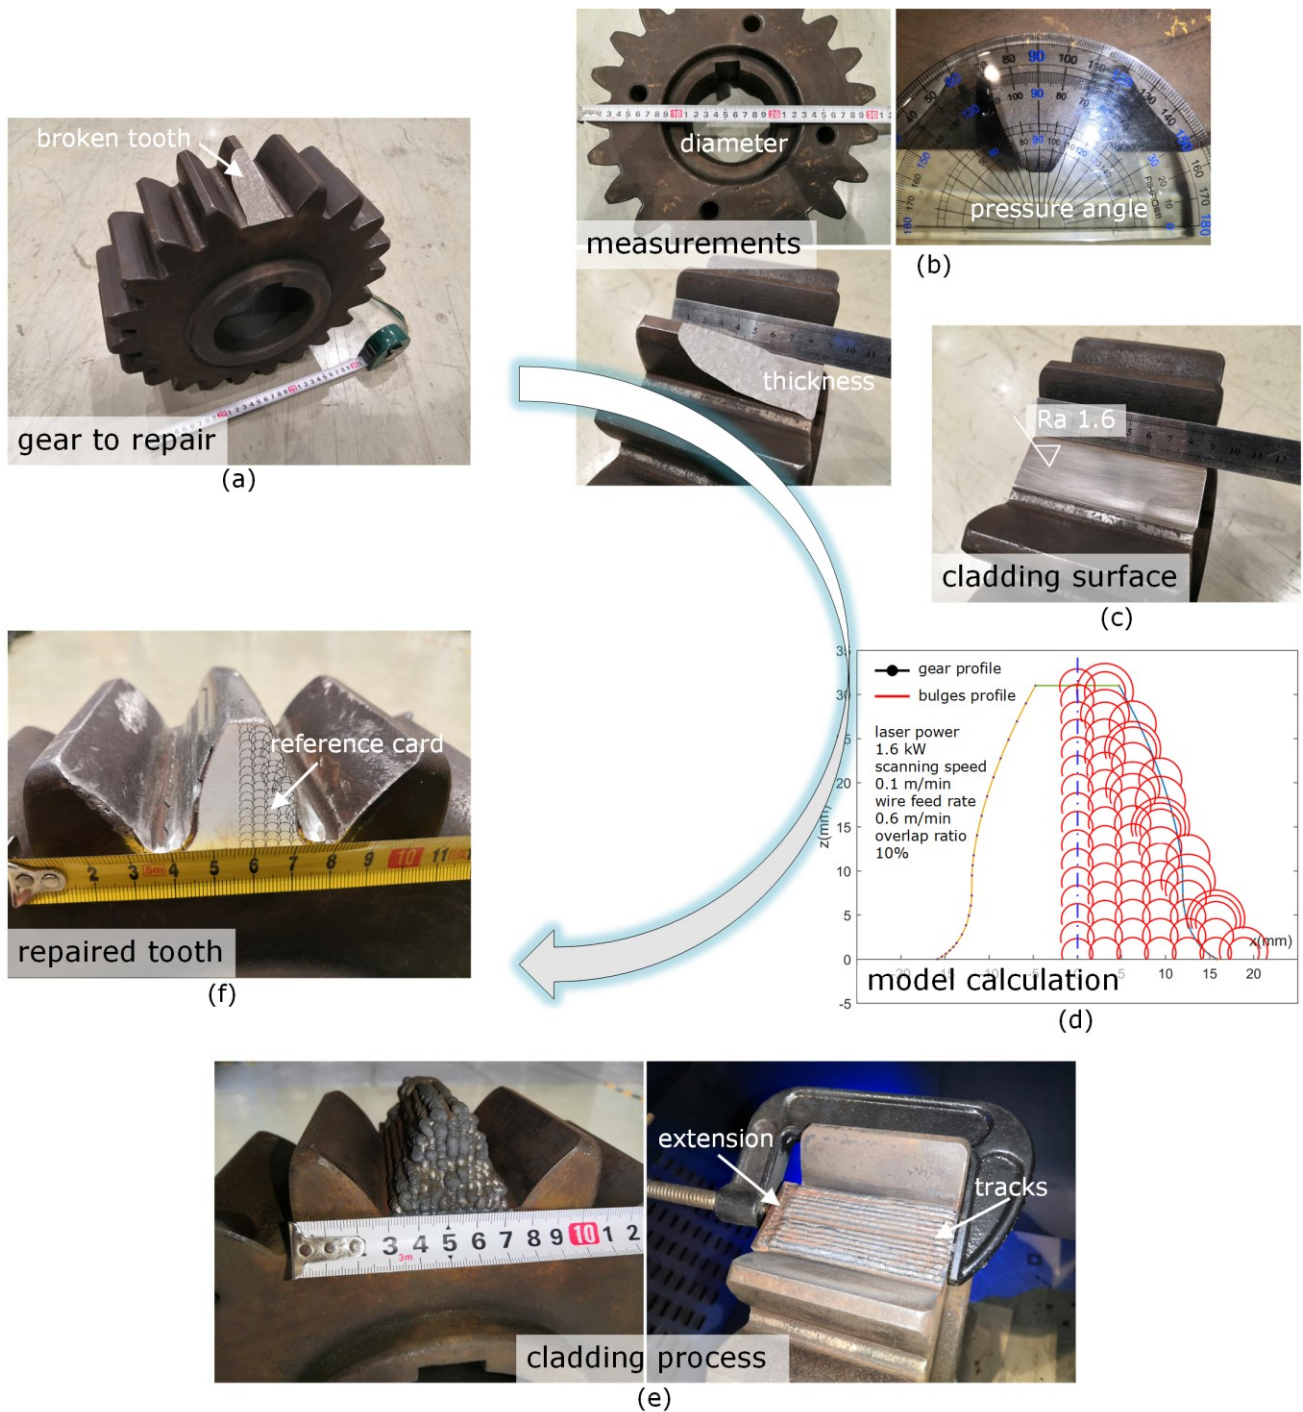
The additive repair process of gear: (a) gear with one broken tooth, (b) measurements, (c) cladding surface preparation, (d) model calculation, (e) cladding process, and (f) final view of repaired gear.
